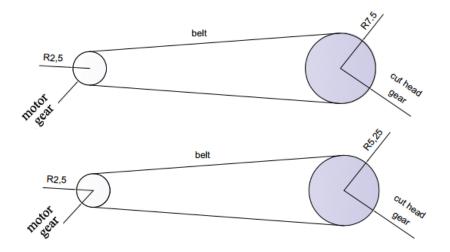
Diameter of pulley cutting head and motor pulley
